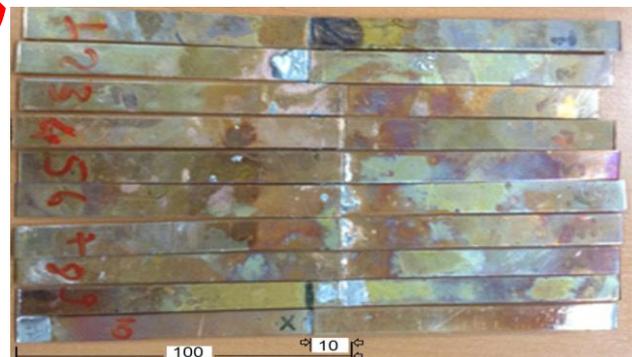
Lap joint shear test specimens and measurements; total length of the specimens is 200mm and lap joint length is 10mm.
